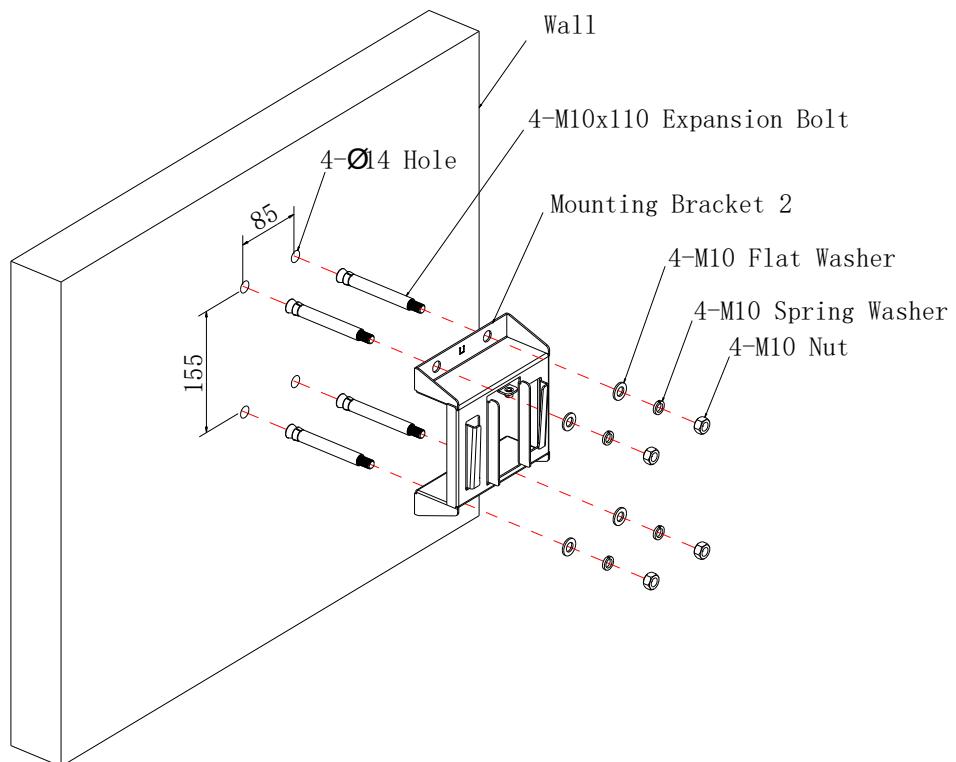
Mounting Bracket 2 Installation Diagram
